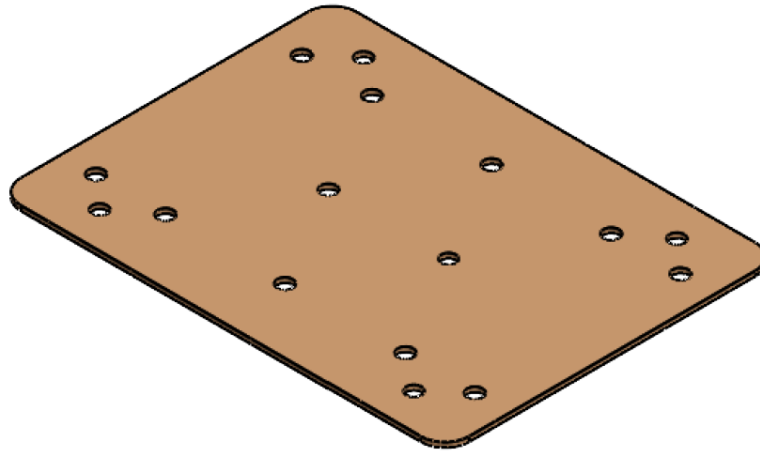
Layout Drawing of Outgoing (Consumer) Terminal Block Assembly for 200/250A CT-Meterbox with Steel Enclosure
